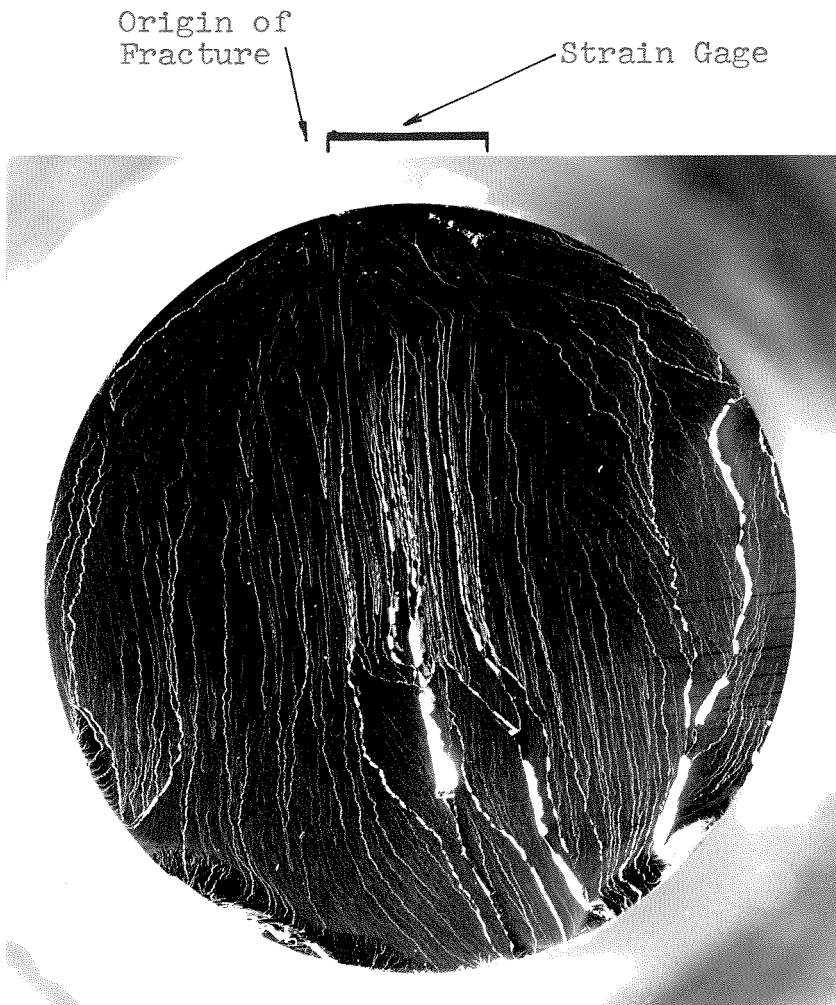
Basal Fracture Surface Near a SR-4 Strain Gage. 7X
